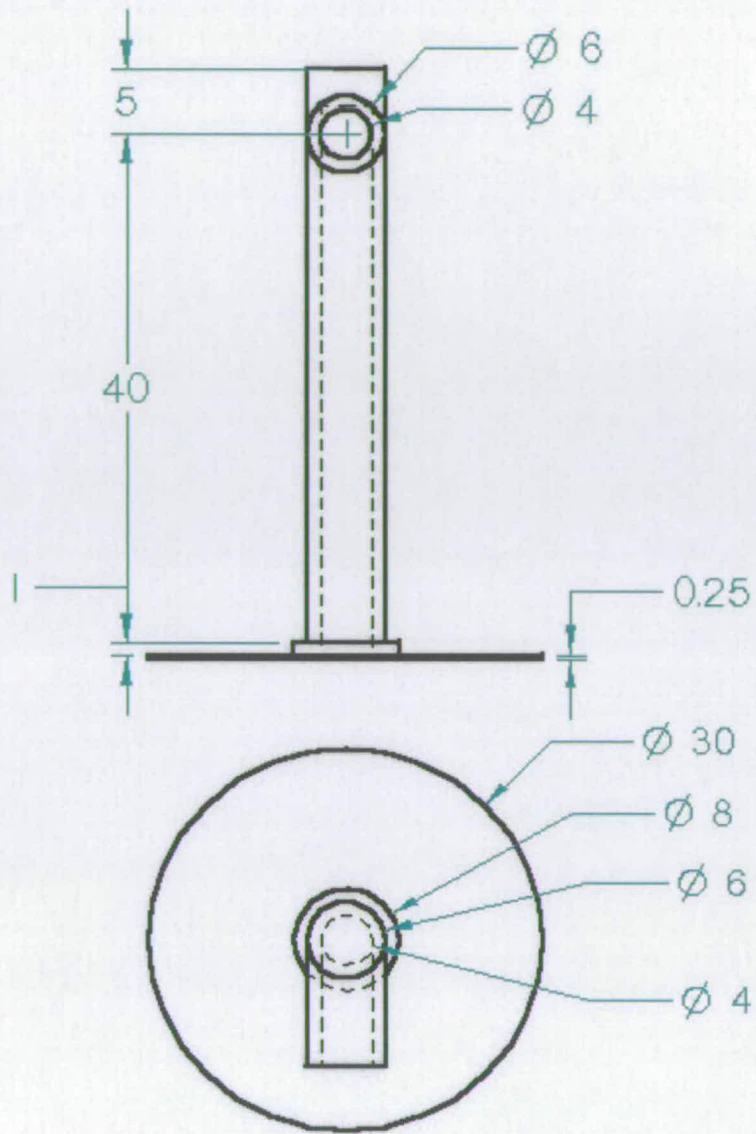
Injector Diaphragm Component (Dimensions in mm)
